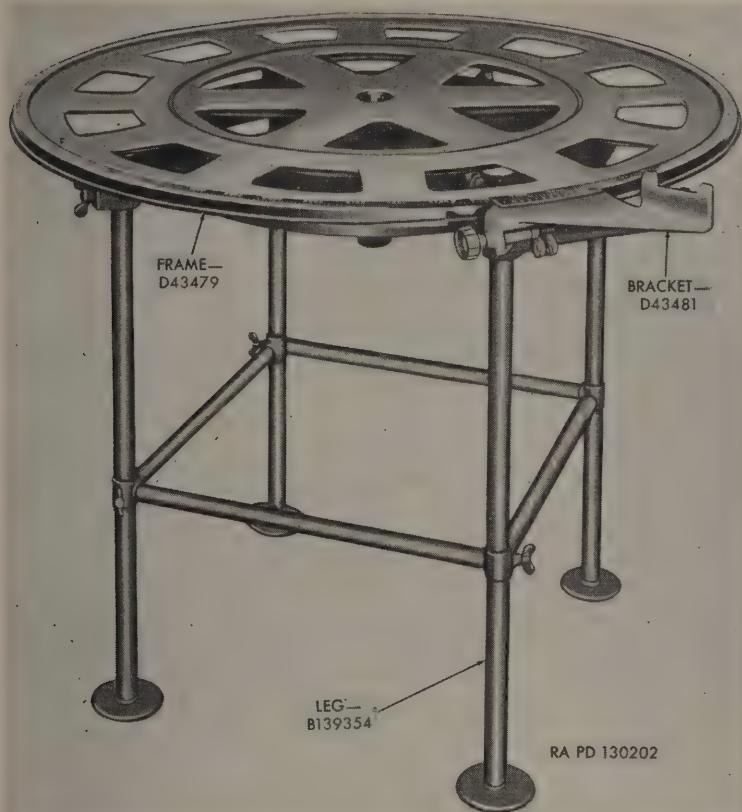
Drafting machine and grid disk removed—plotting board M5 or M5A2.
